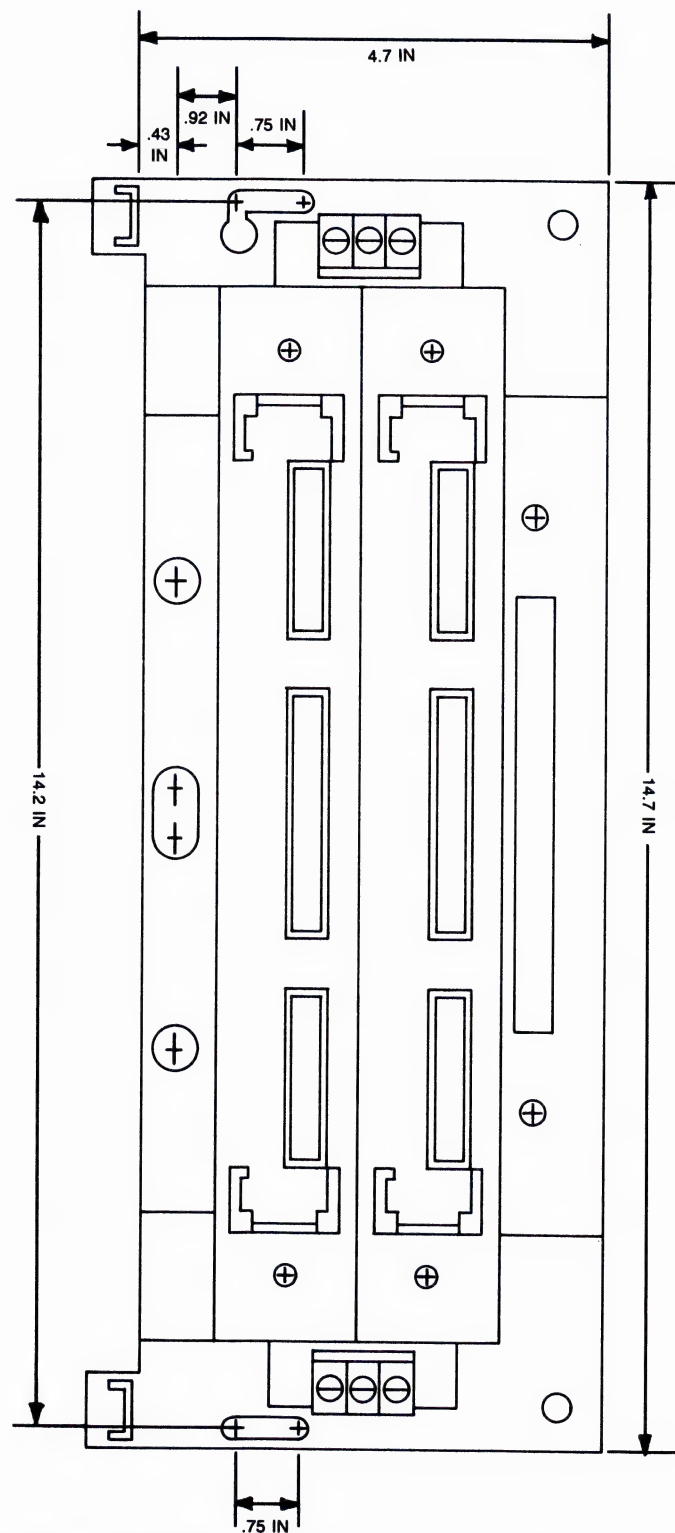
Mounting Dimensions for Adapter Base Assembly (500-5840)
